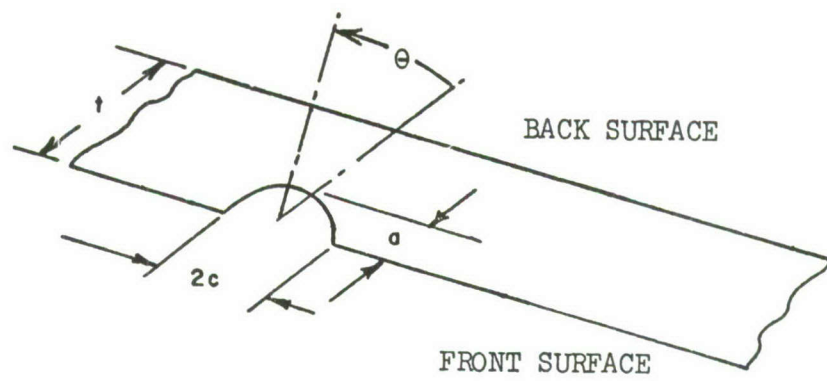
PART-THRU CRACK GEOMETRY
